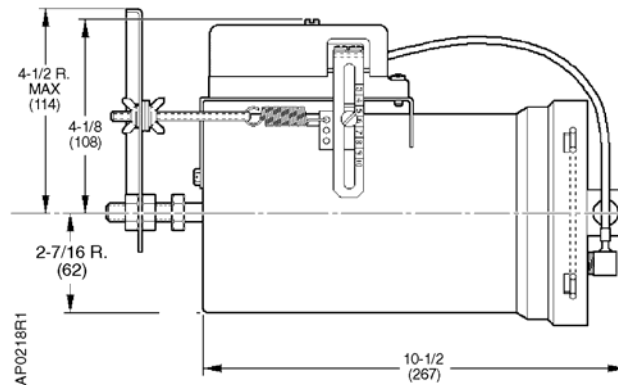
Dimensions with the RL 147 Positioning Relay Mounted. Dimensions in Inches (Millimeters).
